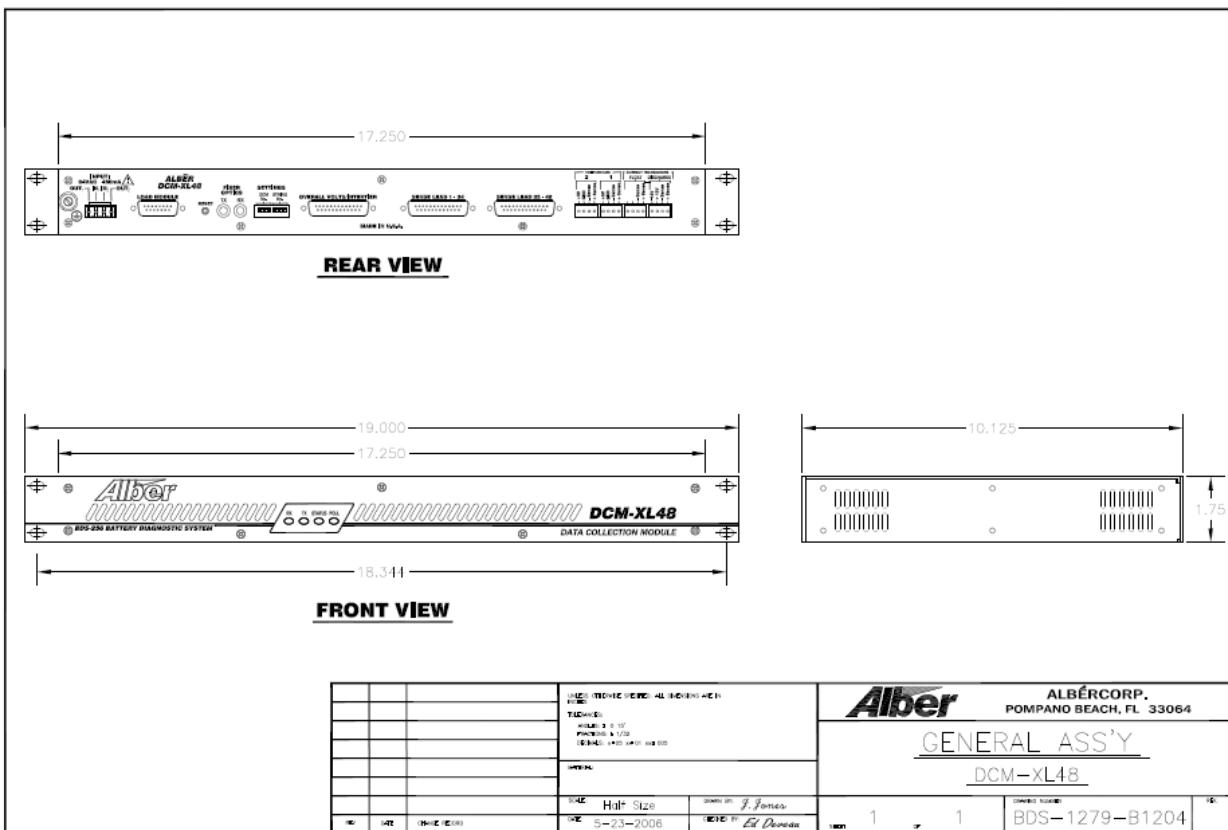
BDS-256XL Front and Rear View General Assembly DCM-XL48 Drawing
